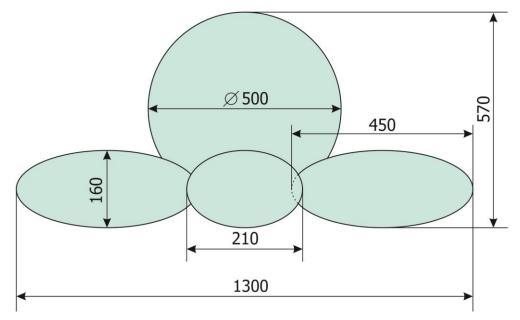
Dimensions of the final prototype (Hetty presented schematically)
